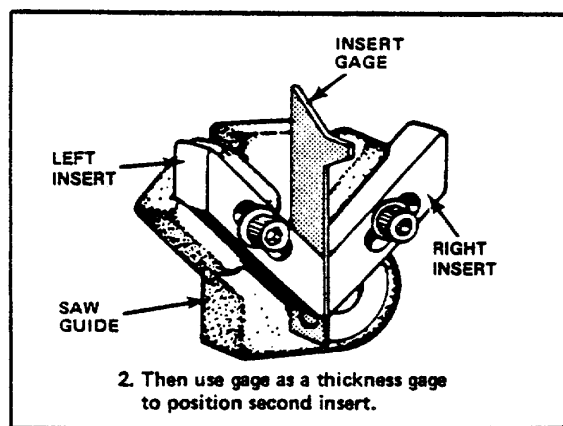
POSITIONING LEFT INSERT. UPPER GUIDE BLOCK SHOWN.
